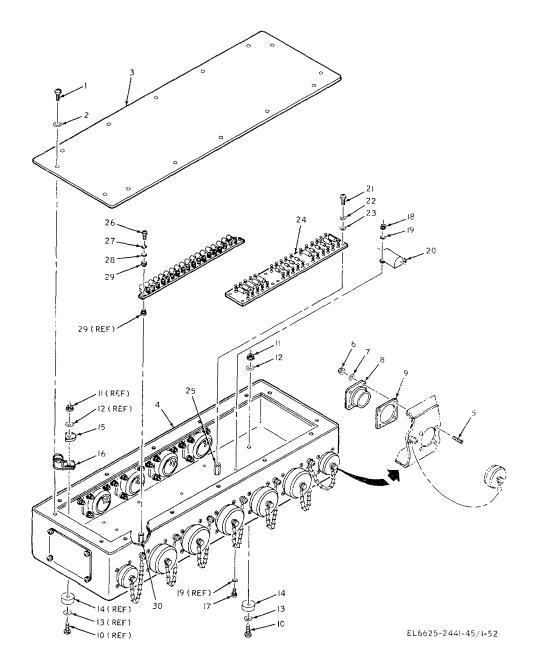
Adapter, Self-Test MX-8586/ASII-386 exploded view.
